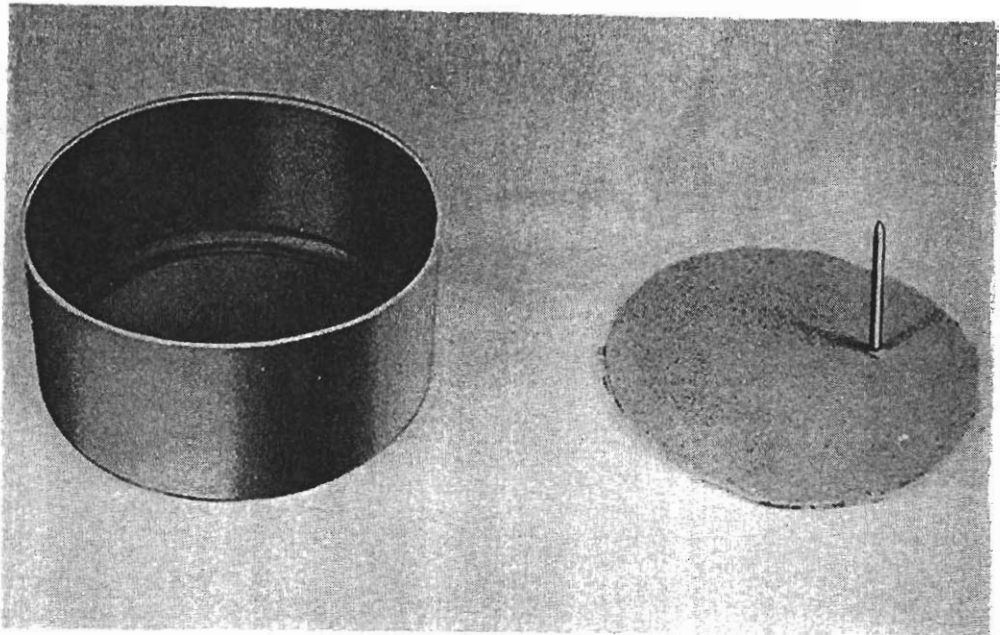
Showing a Suitable Container, Base, and Nail Used When Checking Hydraulic Valve Lifters.
